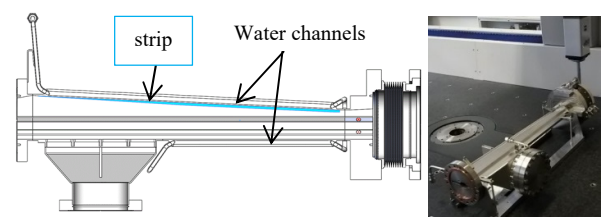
Cut view of the CH14 design (left) and measurement of this chamber on a CMM (right).
